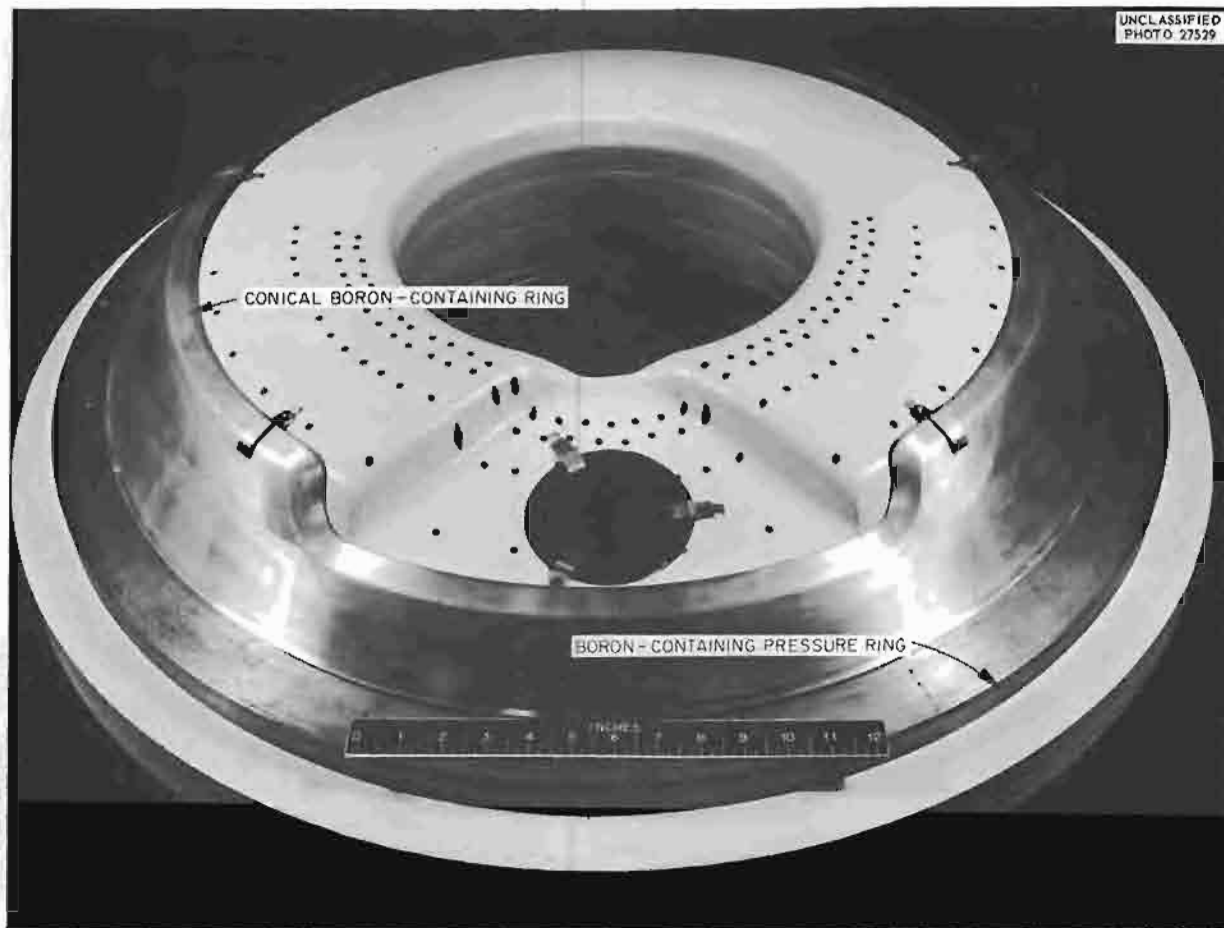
Wooden Model of Top of Reflector Showing Boron-Containing Conical Ring and Pressure Ring Assembly.
